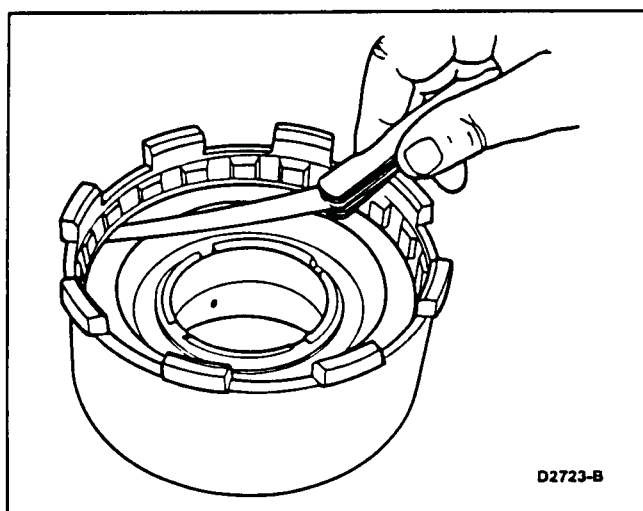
Clearance Check Between Pressure Plate and Retaining Ring
